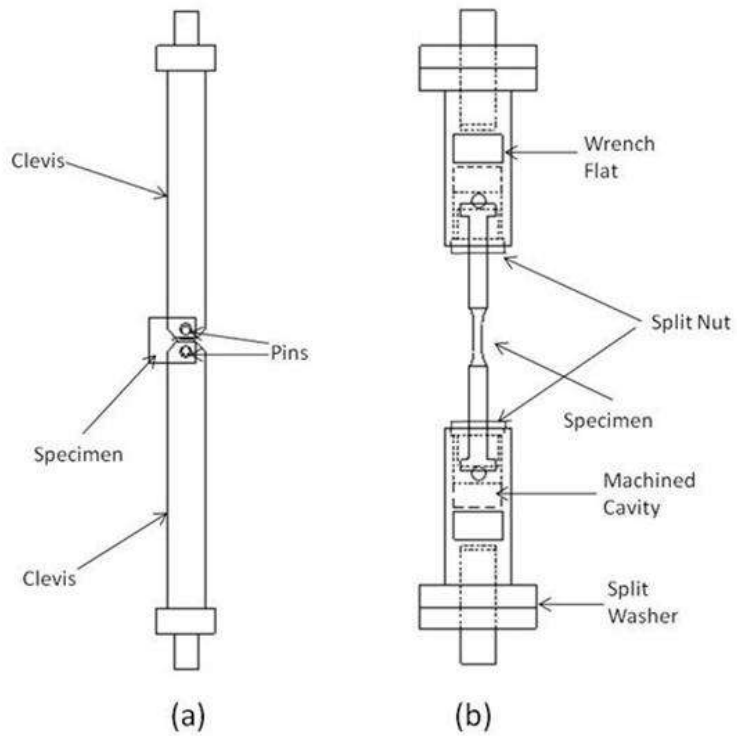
(a) C(T) gripping system, (b) button-head gripping system
